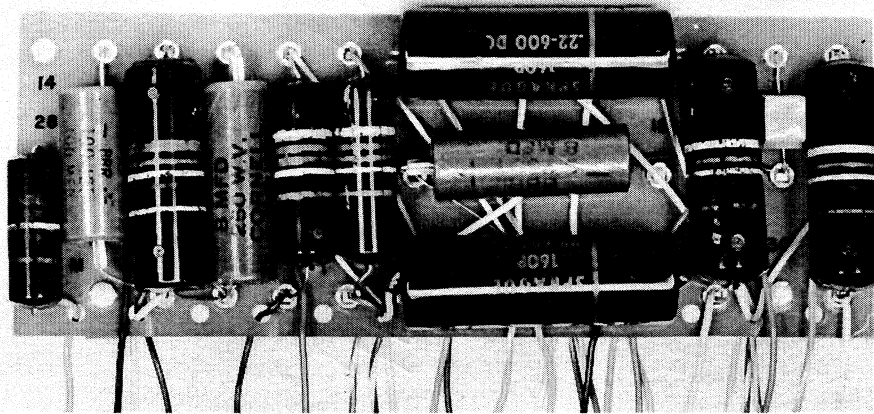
REAR VIEW OF THE PARTS BOARD, WITH THE CAPACITORS AND RECTIFIER MOUNTED. COMPARE THIS PHOTO WITH FIG. 4 ON THE SHEET OF DIAGRAMS
